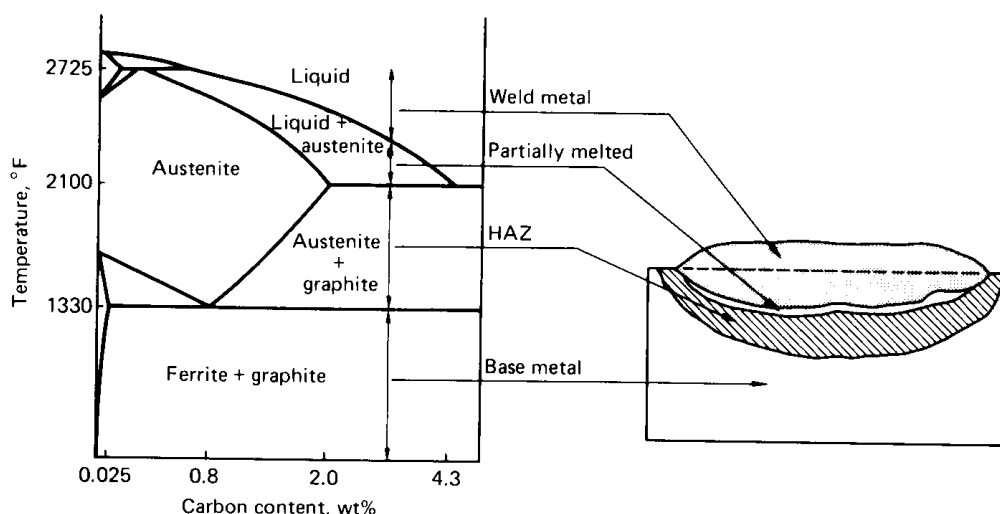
Schematic representation of the temperature zones in a typical cast iron welding
